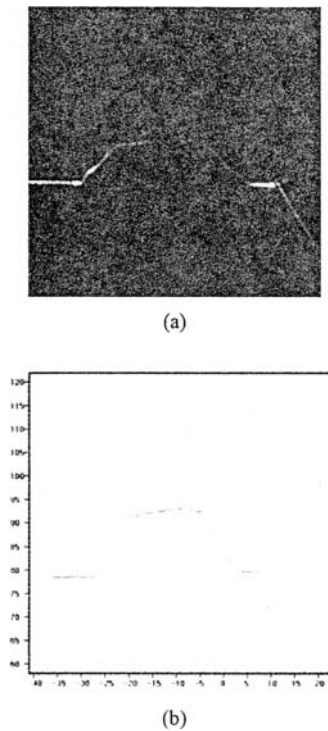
12th weld pass in U-groove on a 38° workpiece: (a) raw image; (b) profile.
